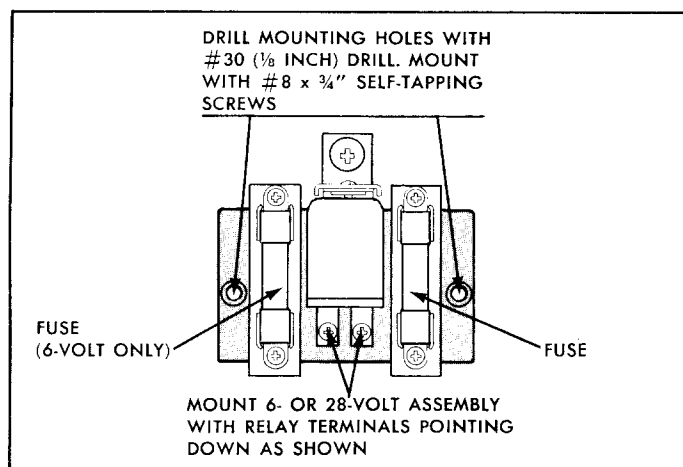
A—Installation of 6/28-Volt Fuse Assembly
